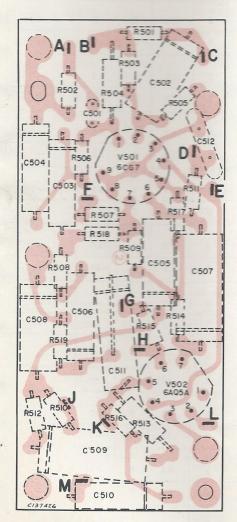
PW500 Printed Wiring Vertical & Sync Assembly
